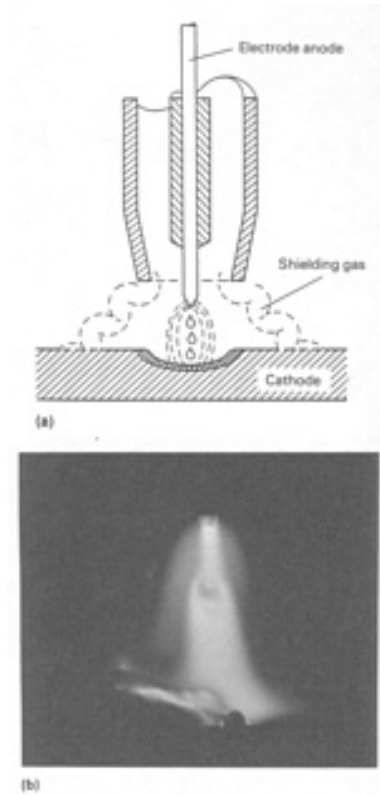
SPRAY TRANSFER MODE IN GAS-METAL ARC WELDING OF STEEL. (A) SCHEMATIC SHOWING TRANSFER OF ELECTRODE MATERIAL DROPLETS ONTO CATHODE BASE METAL. (B) HIGH-SPEED PHOTOGRAPH OF SPRAY METAL TRANSFER MODE
